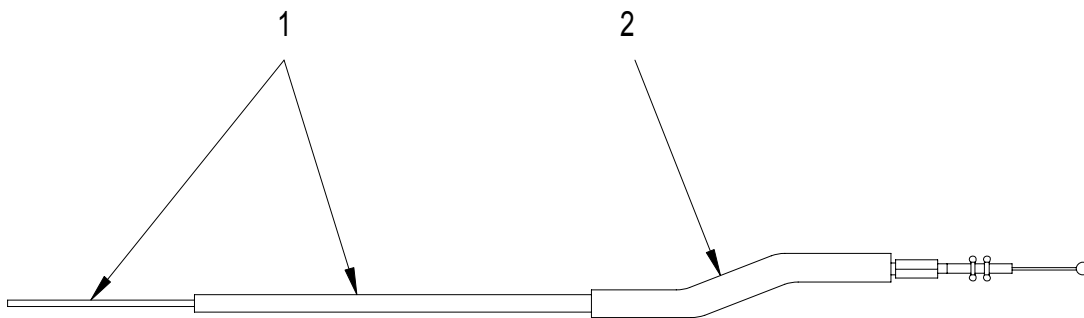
LOP Engine Shutdown Cable Assembly (MEP-531A/501A)
